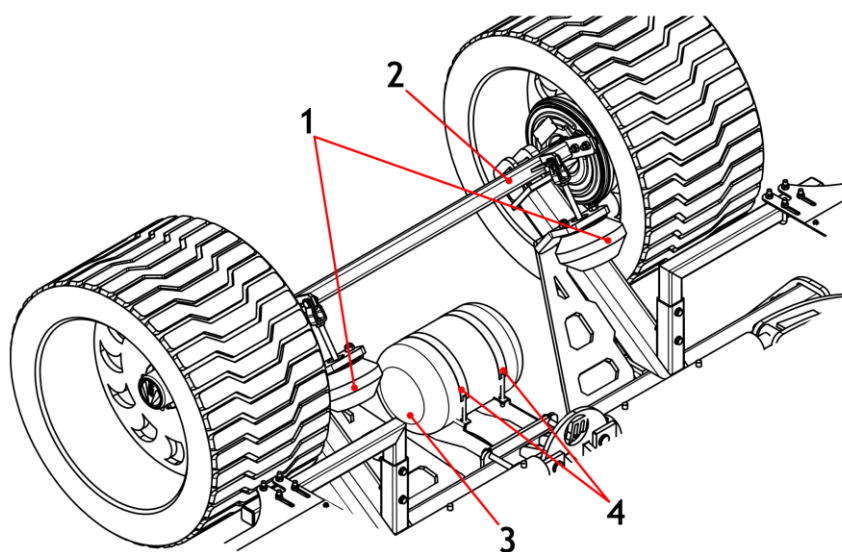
Main parts of cultivation roller air brake (1 - diaphragm cylinder, 2 - break beam, 3 - air tank, 4 - air tank holders)
